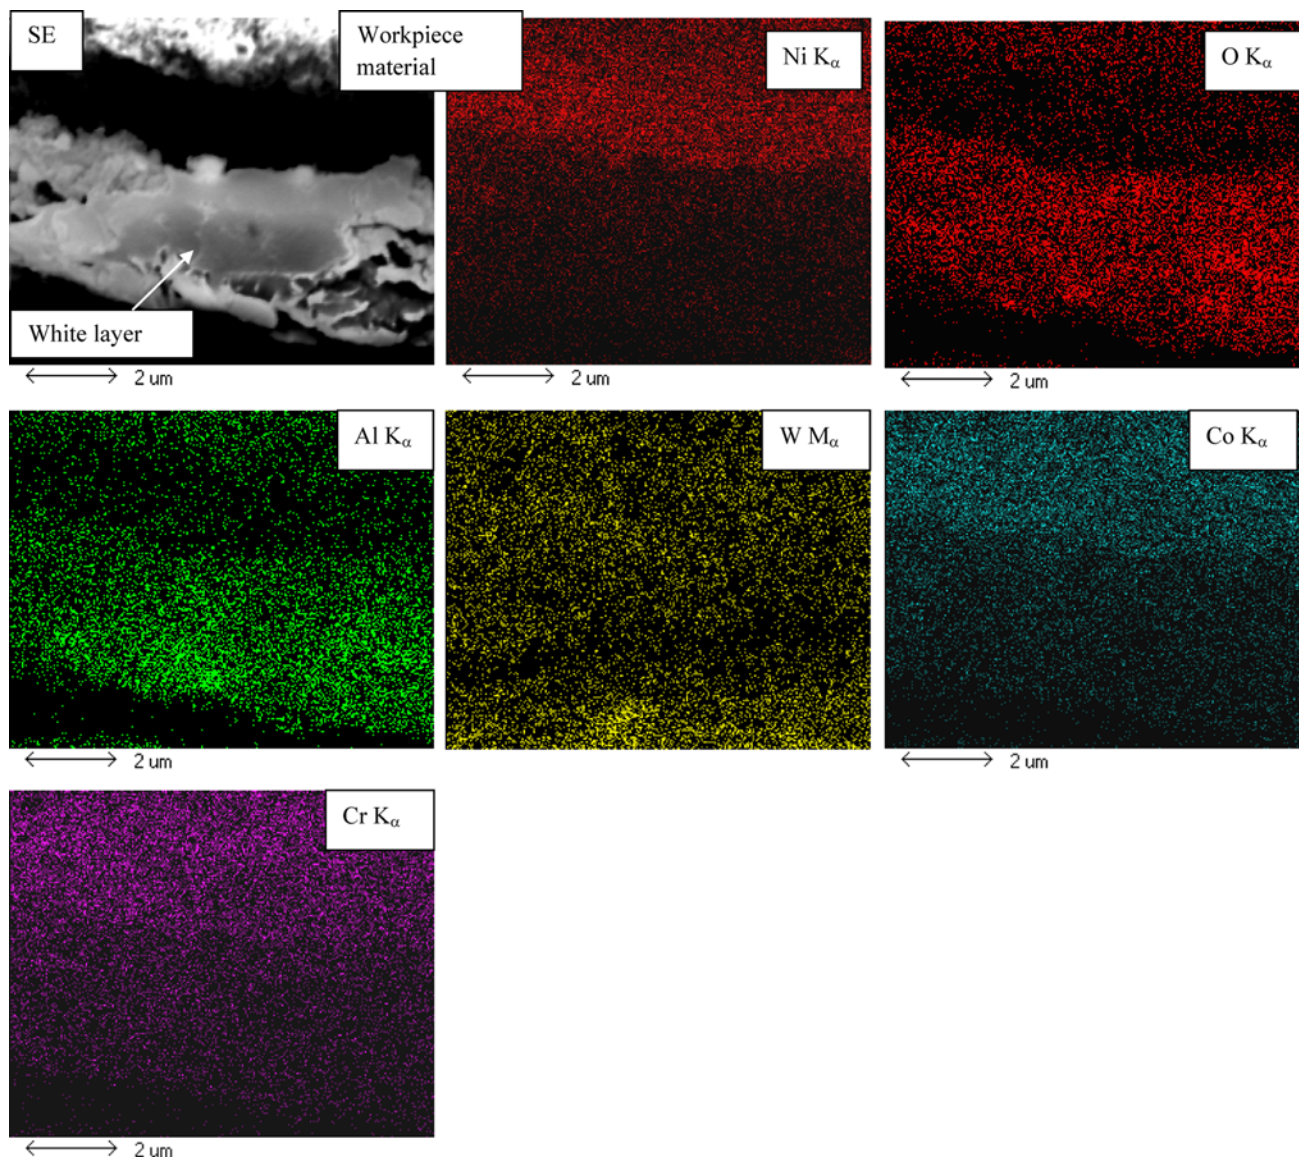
Elemental map of the white layer on the surface of machined part of ME 16 alloy. Cutting speed 40 m/min
